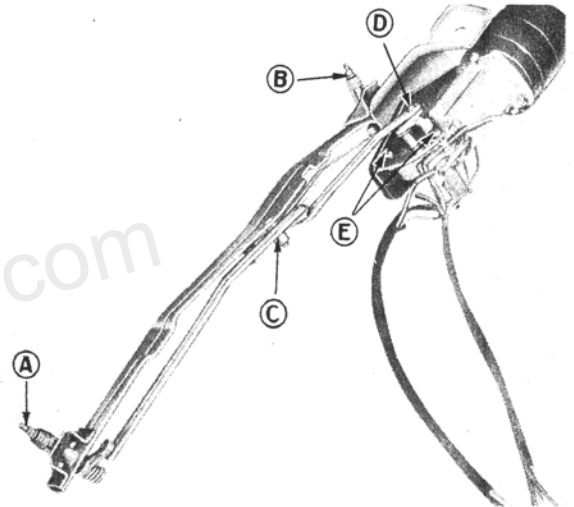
Wiper Parts Used Underneath Cowl (Assembled)
